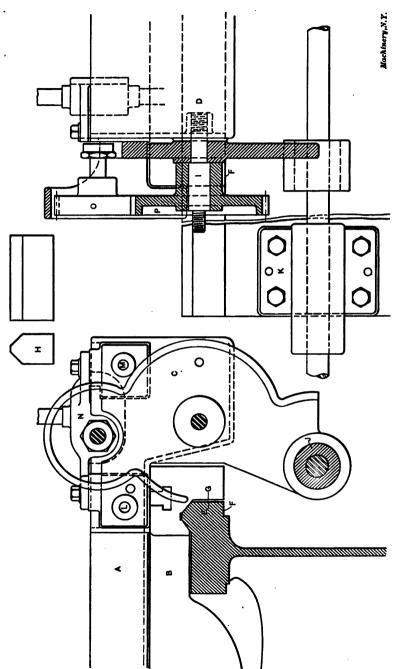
Method of Laying Out and Aligning an Oil Pump Attachment on an Engine Lathe. Illustrating the Principle of Avoidance of Assembling all the Members together for the Laying-out Operations
